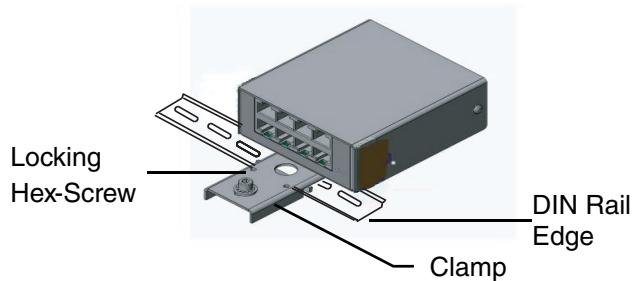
Time Strobe Converter DIN Rail Clamp and Mounting Bracket Assembly
